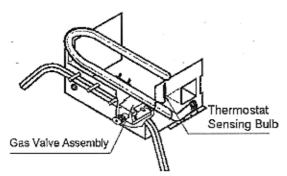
Location of Gas Valve Assembly and Thermostat Sensing Bulb
